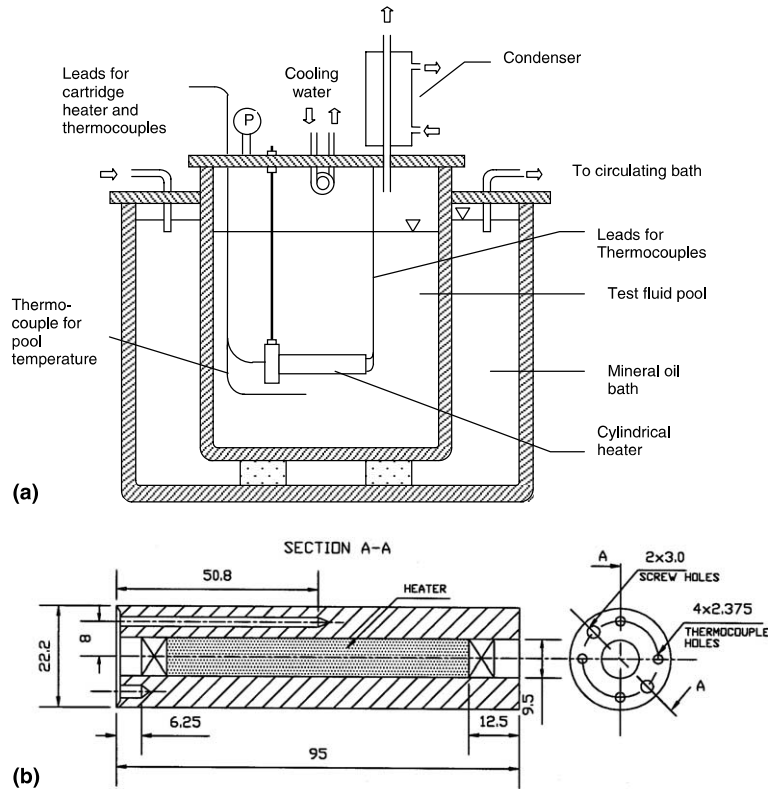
(a) Schematic of pool boiling apparatus, and (b) construction details of cylindrical heater assembly.
